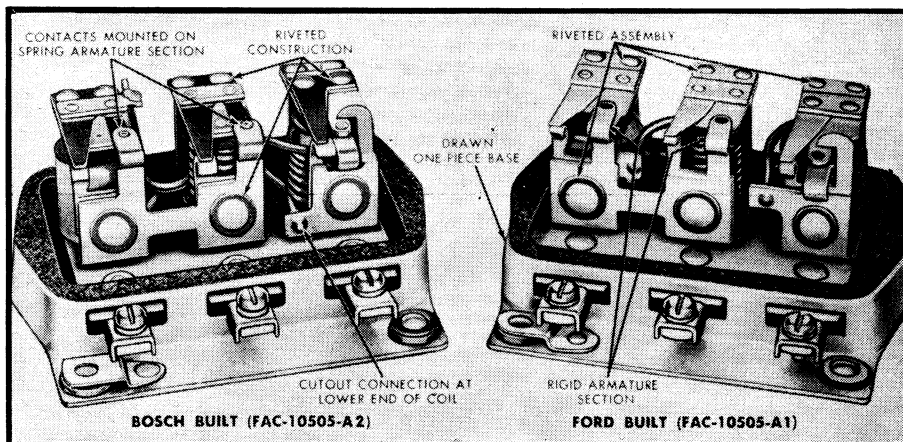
Ford 1950 and later three-unit regulators. There is no provision for making mechanical adjustments on these units—only electrical
